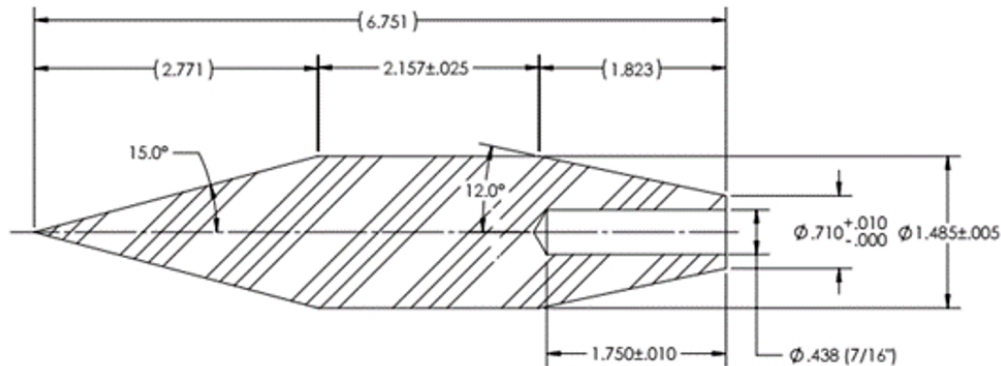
Machine drawing for one-piece axisymmetric polycarbonate projectile
